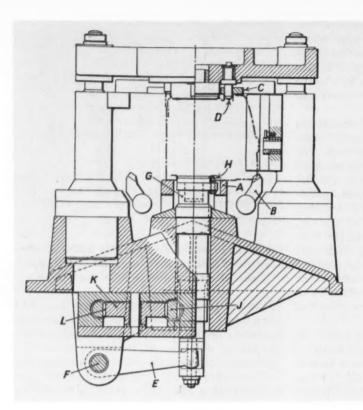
Ram (G) in this multiple drilling, automatic transfer machine lifts the workpiece and rotates it through an angle of 90 degrees.
